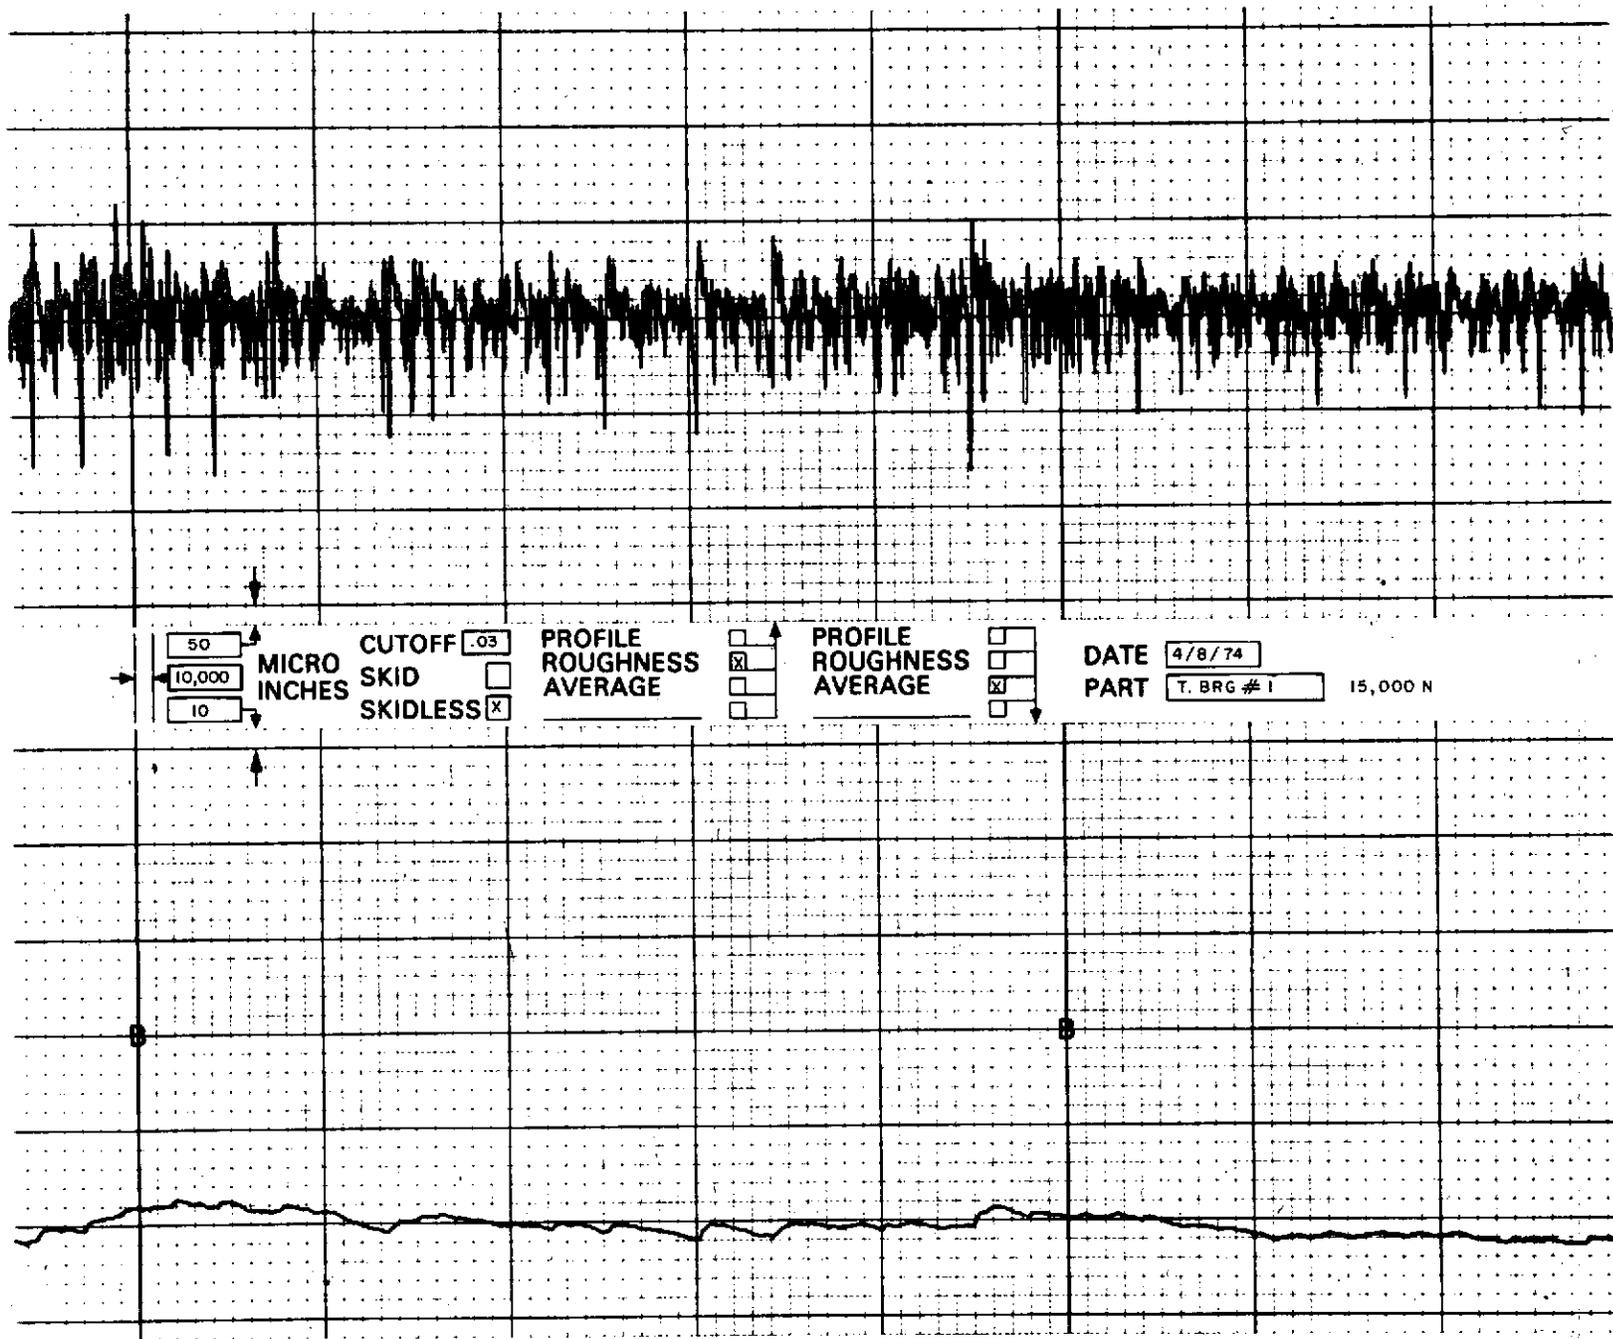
Surface Finish, Thrust Runner #1, After Grinding MoS₂ Coating to Required Coating Thickness
